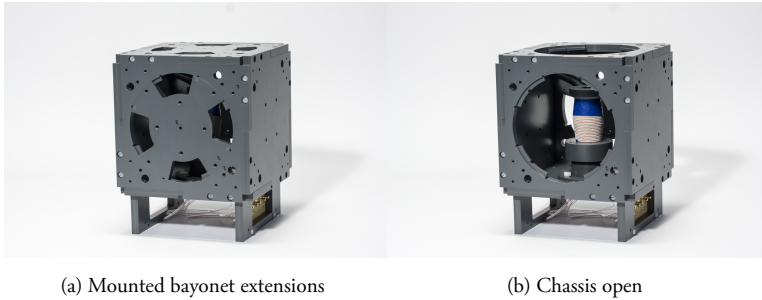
Photographs showing the complete MPS system assembly inside the chassis with a) mounted sidewall bayonets, b) removed sidewalls. (b): © IEEE 2015, [134].
